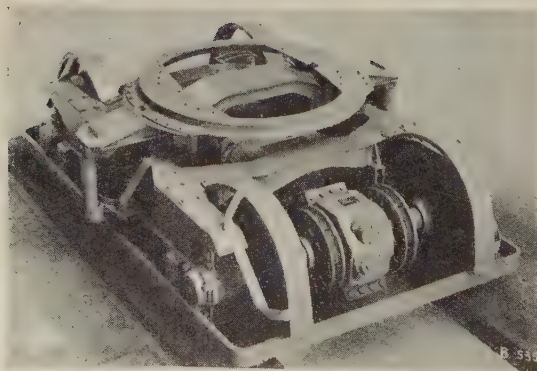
Driving bogie of figs. 497, 496, 495 and 499 with body pivot ring on the side bearing springs. The pivot ring on ball bearings forms the body cradle. The driving bogie is here complete. This photograph clearly shows the double discs with rubber insert carrying the whole motor transmission group.
